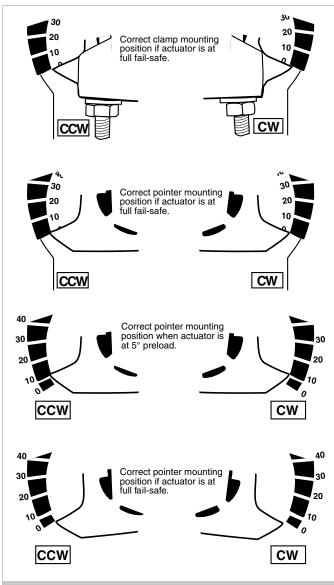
FIGURE A – Universal Clamp and IND-AF2 Pointer (optional) positions indicating fail-safe and pre-load settings
